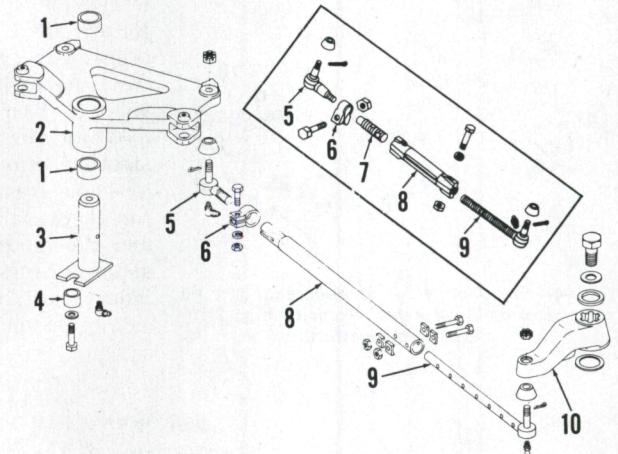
Exploded view of bellcrank and tie rods used on adjustable axles. Inset shows parts used on tractors to serial no. 034597.
